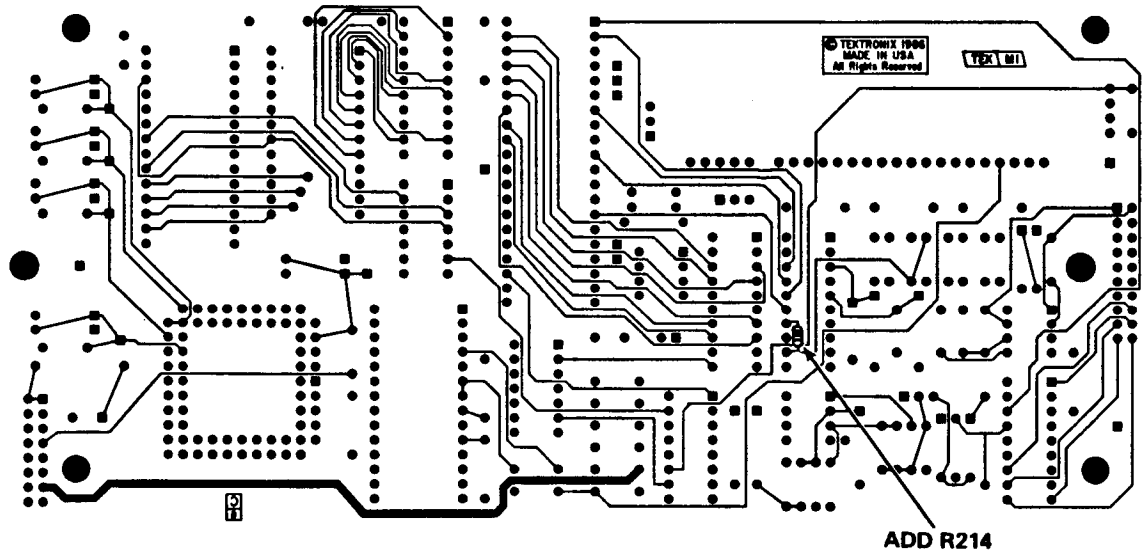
Backside (solder) side of the Kernel ckt bd.
